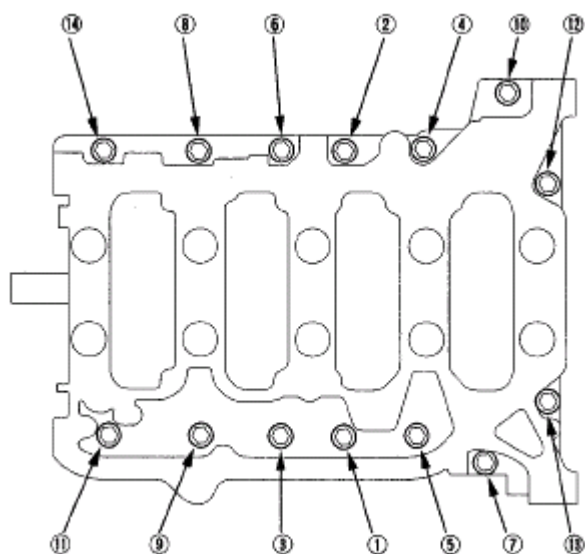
Identifying Bearing Cap Bolt Tightening Sequence
